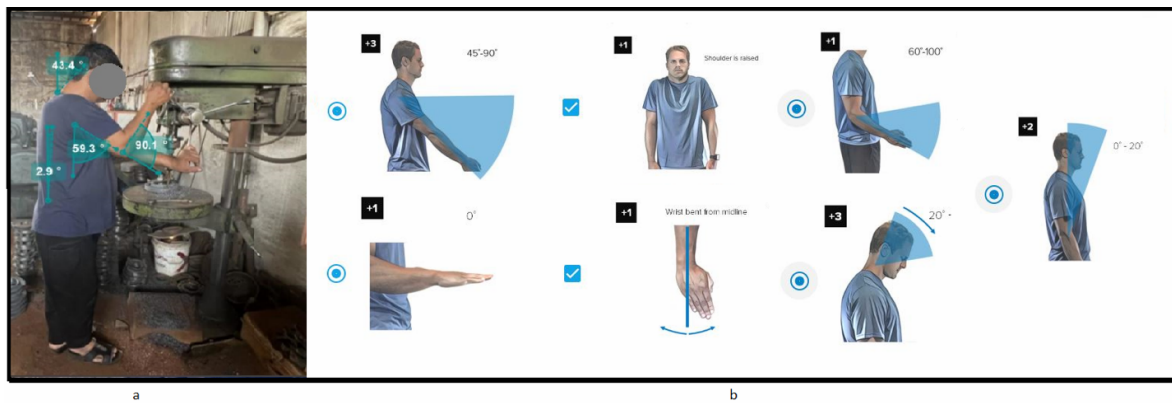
(a) An operator performing a milling task (b) RULA assessment - milling task
